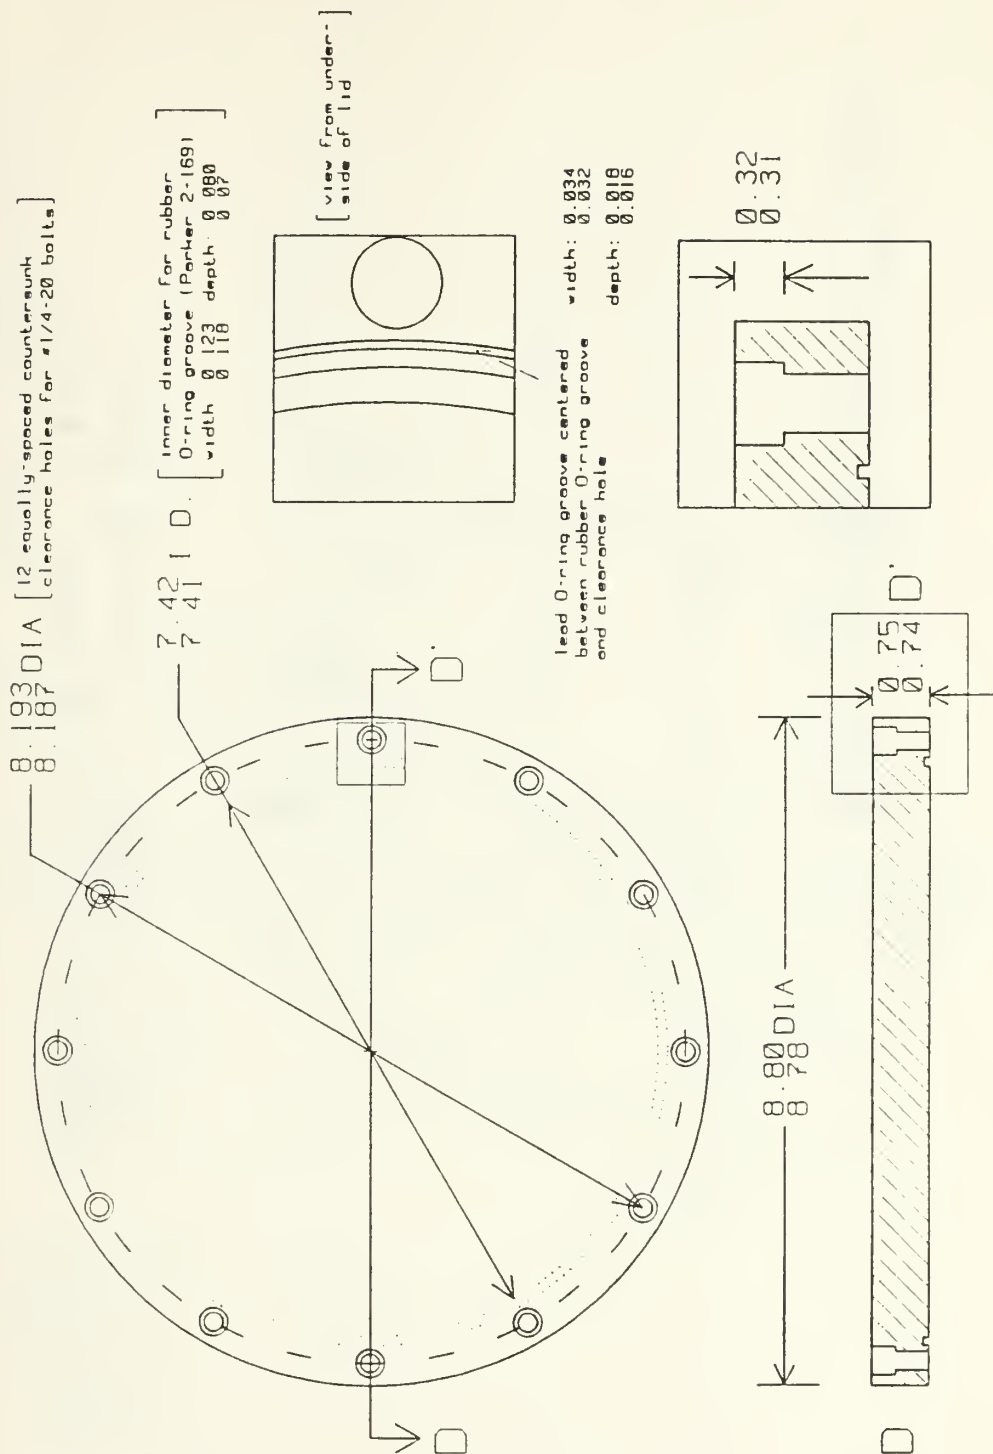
Driver Housing Pressure Lid with Bolt Circle and O-ring Details
